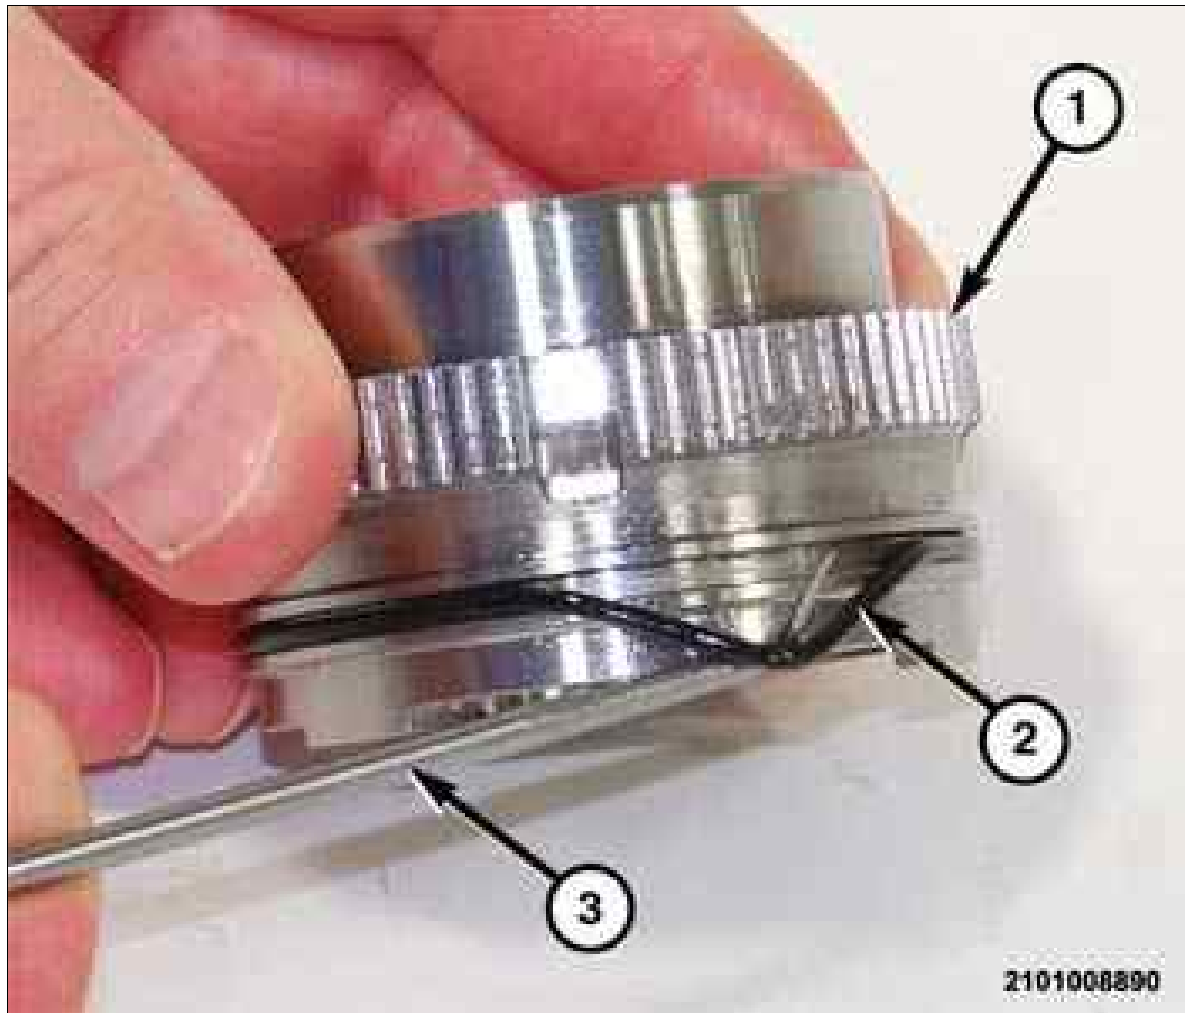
Dog F-Clutch Plug & O-Ring Seal
